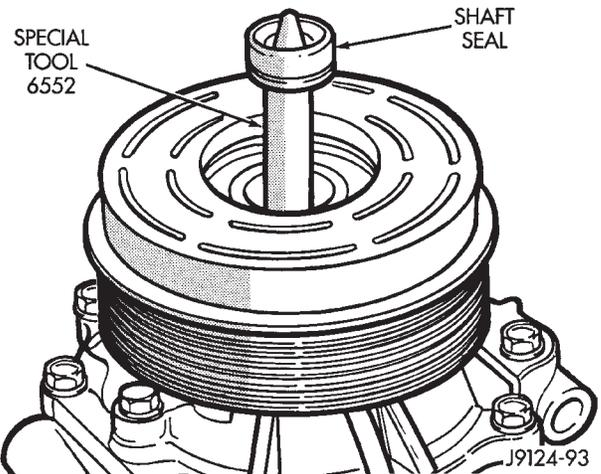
Compressor Shaft Seal Sleeve Proctor
